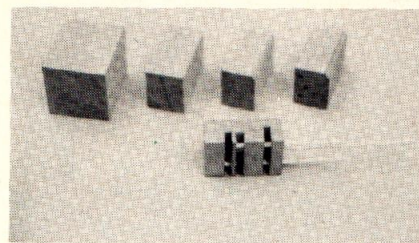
A COMPLETED BEARING BLOCK with shafts and gears is shown in the foreground. The background shows the progression of fabrication steps.
